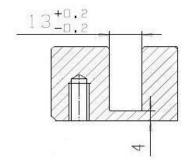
Cross-section-view of the one grooved sill profile F (Sill profile drawing 776838).
